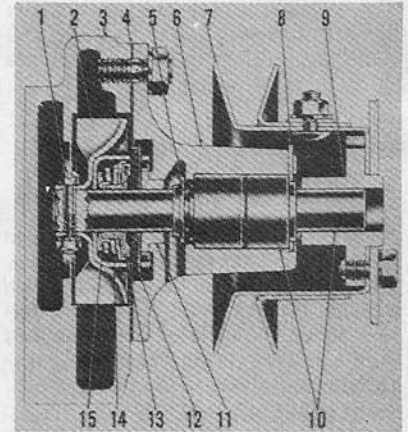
B—Models TE20, TO20, and TO30 engine water pump. Bearings and shaft (10) are renewed as an assembly. Seal seat (11) is not serviceable. Refer to Fig. F22A for legend to callouts.
